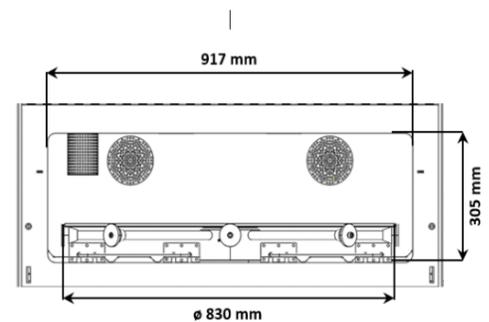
INTERNAL DIMENSIONS OF THE TREATMENT CHAMBER
